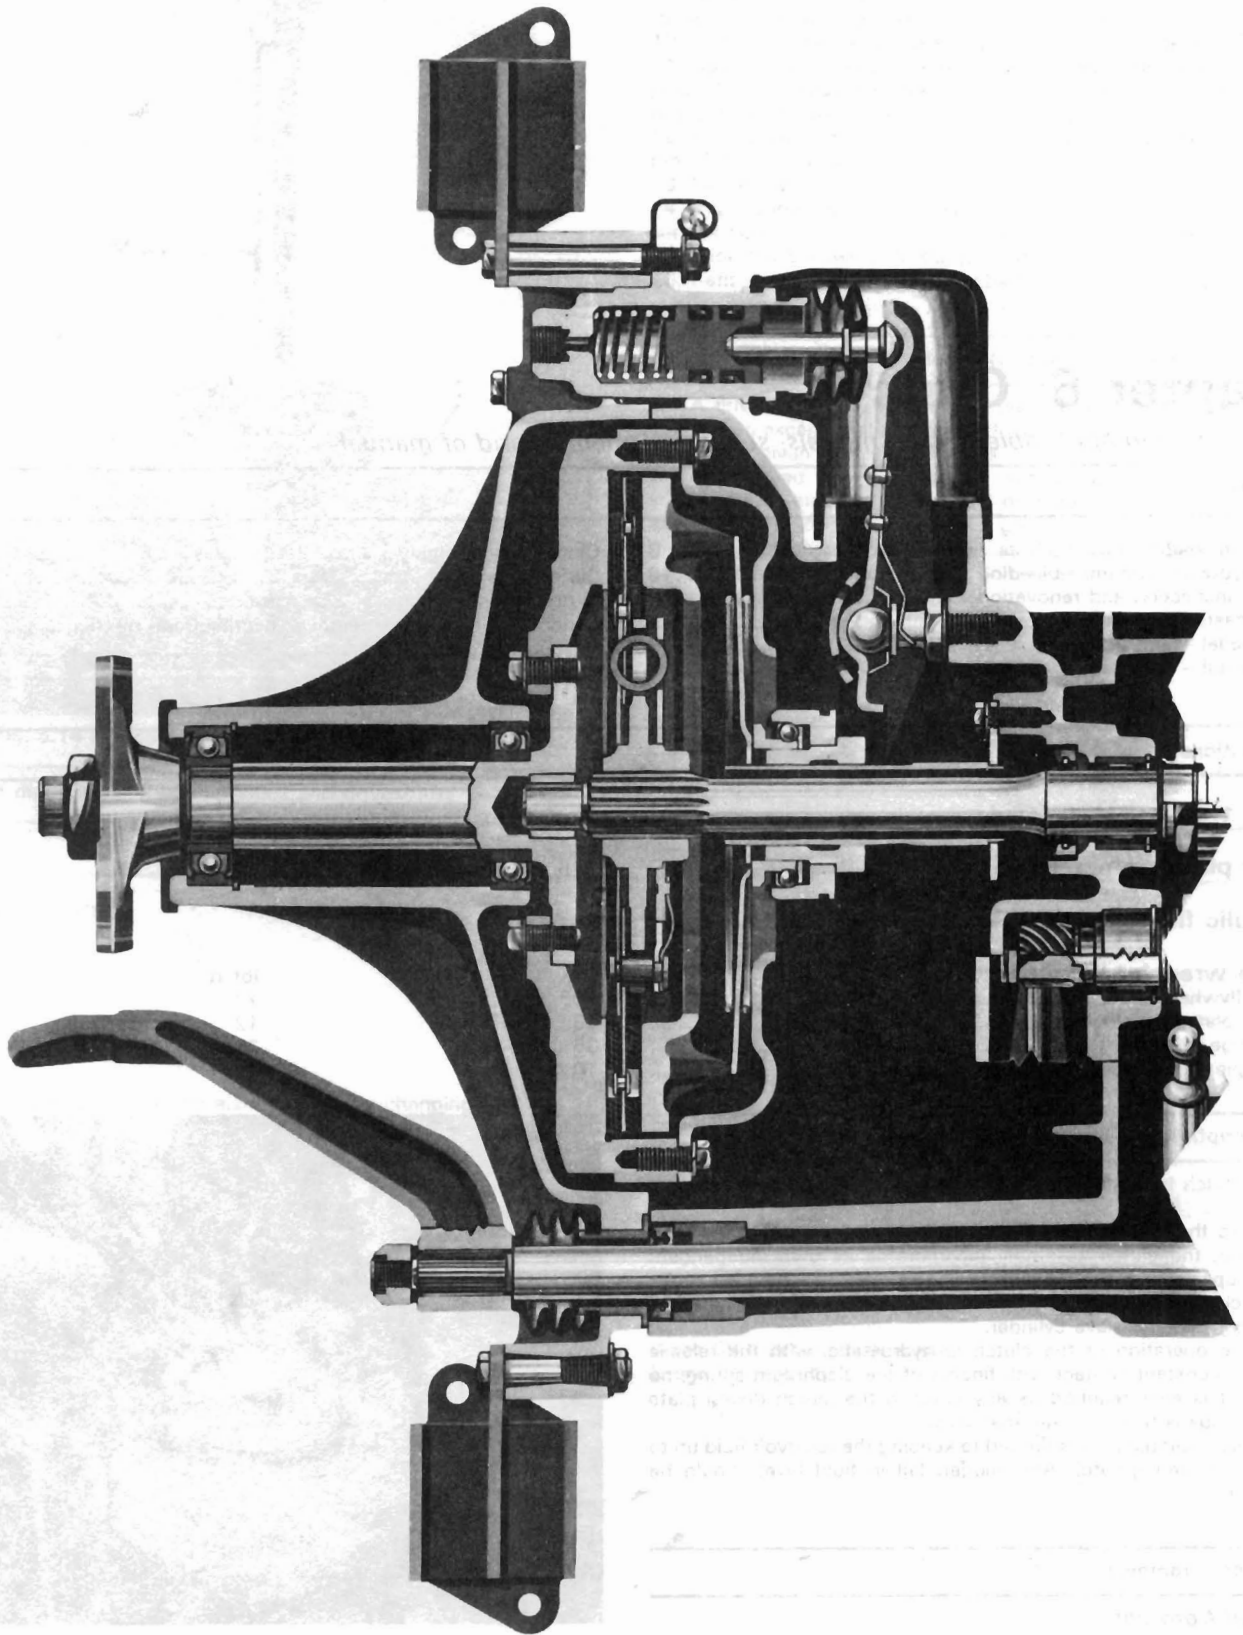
Cutaway view of clutch assembly (Sec 1)
